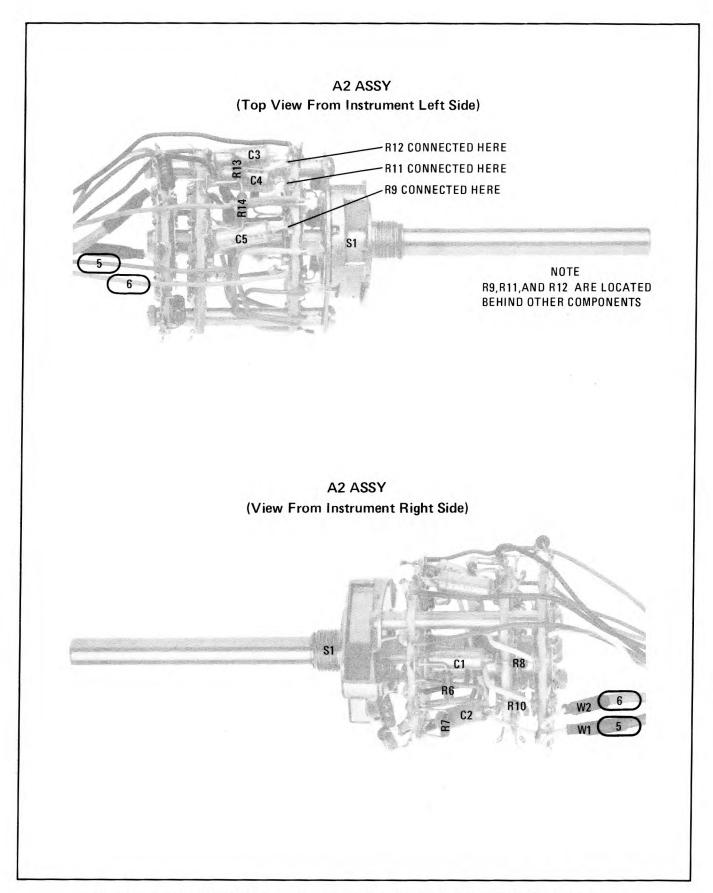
A2 RANGE Switch Assembly (Low Pass Filters) Component Locations
